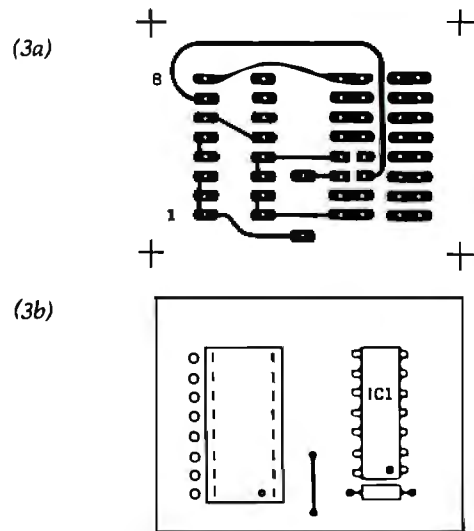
Printed-circuit artwork and layout for the control-plus-reset conversion. The circuit board has a 16-pin socket on the top side to accept the keyboard cable, and a dual in-line 16-pin header on the bottom (foil) side to plug into the motherboard's keyboard socket. As seen from the top (figure 3b), the holes for the socket are located to the right of the holes for the header pins. From the foil side of the printed-circuit board (figure 3a), the situation is reversed—the left holes (on the elongated pads on the right half of the board) are from the socket, and the holes on the right go to the header pins. Also, note the placement of the dot in figure 3b, which marks pin 1 of both IC1 and the 16-pin socket.
